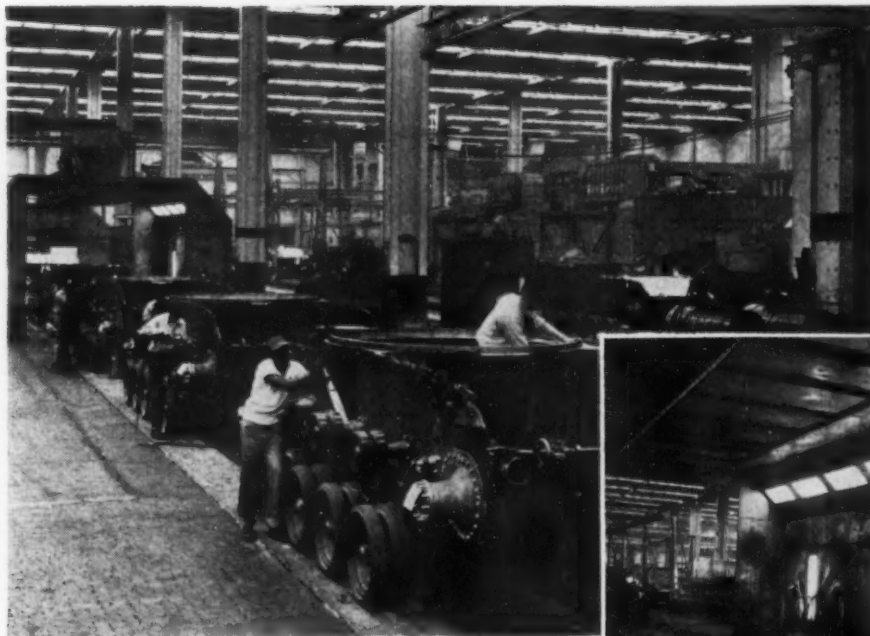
Cleveland-Cadillac Tank assembly line, showing grinders touching up tanks before cleaning operation.
